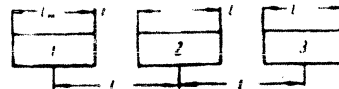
Determination of Center to Center Clearance between Two Assembly Places (Stations)
